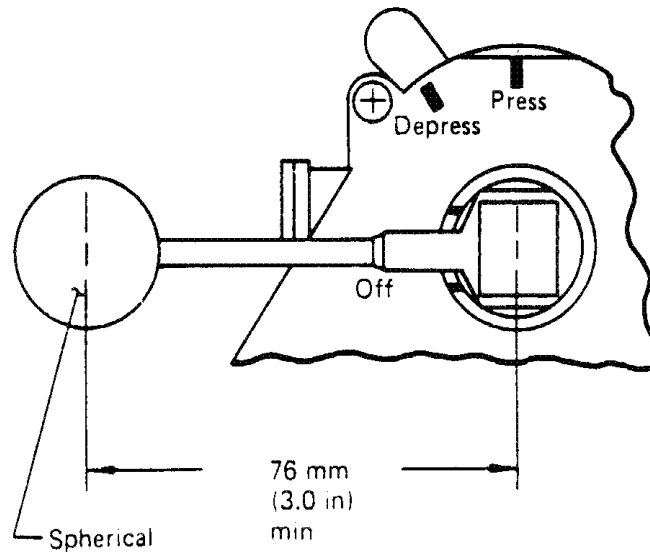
VALVE HANDLE – LEVER TYPE
